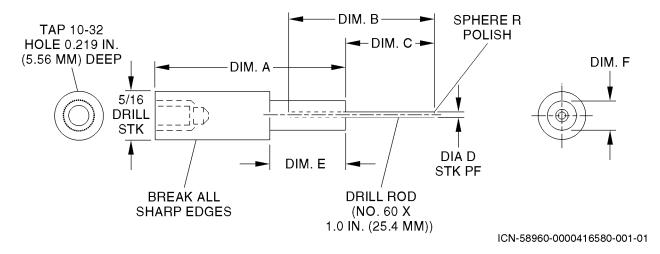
Contact Seating Inspection Kit Contact Adapter, T3009406-7
